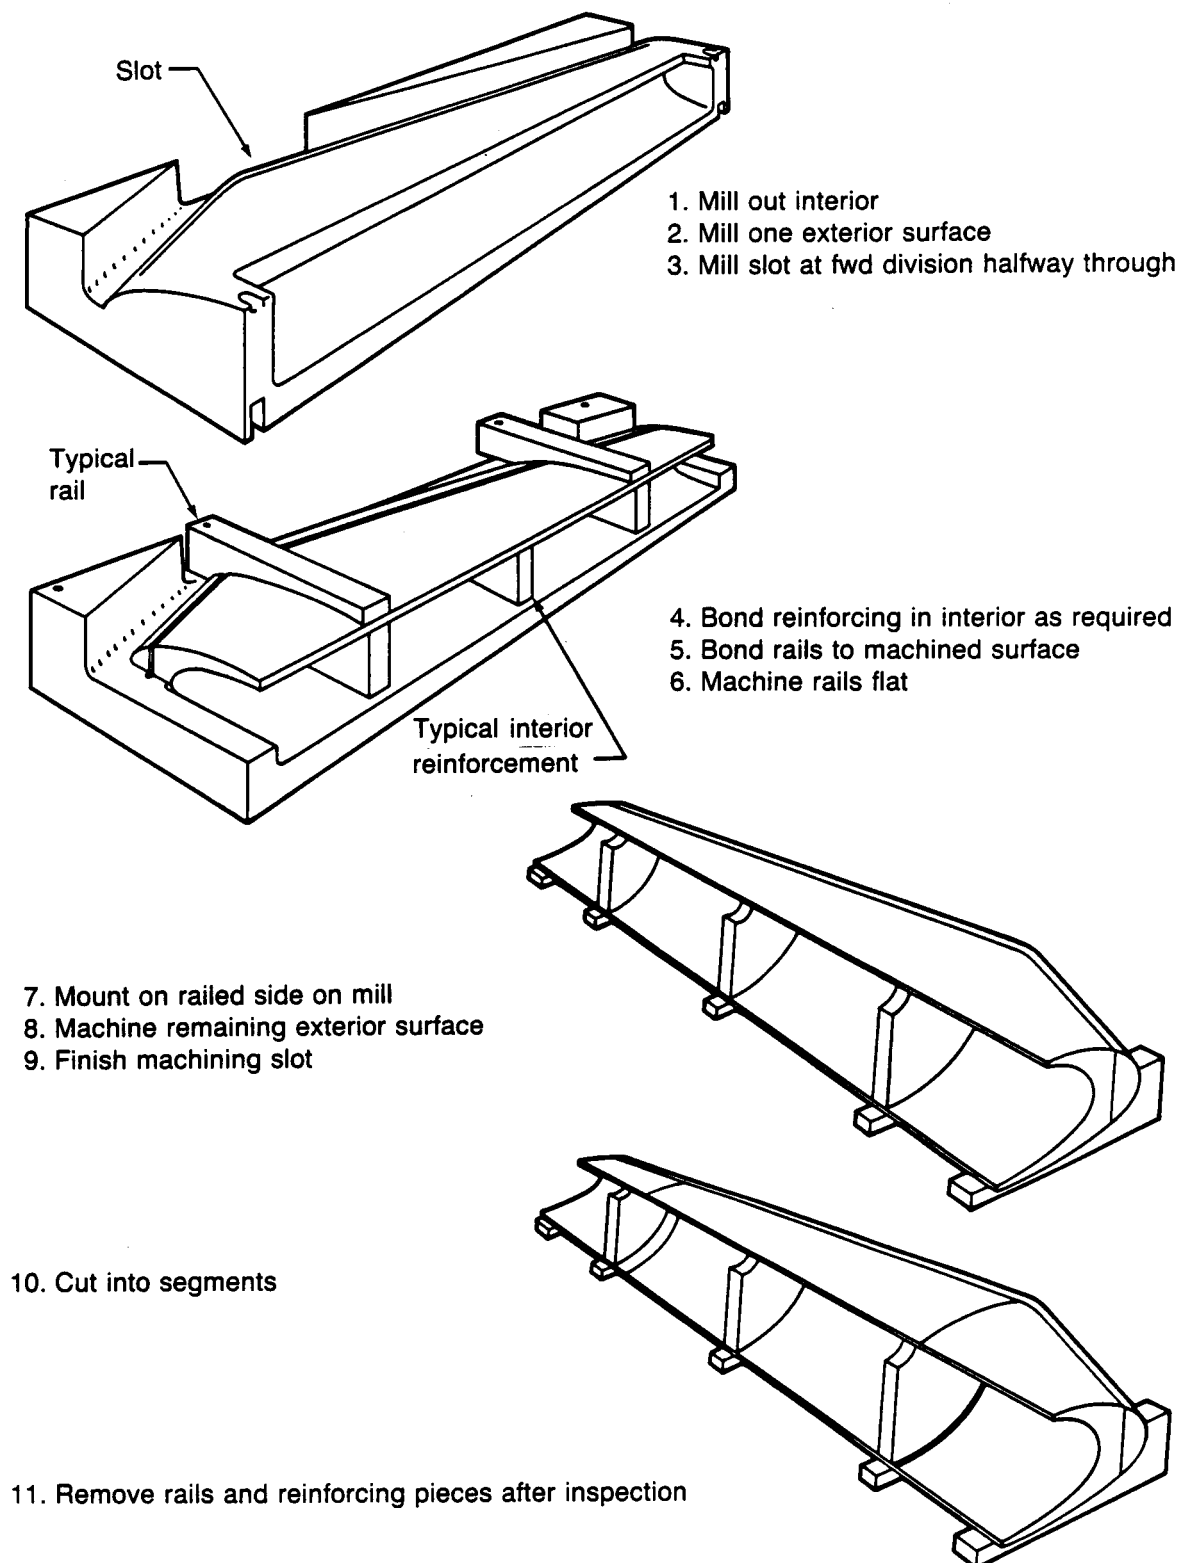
Machining Sequence for Glove Leading Edge Segments
